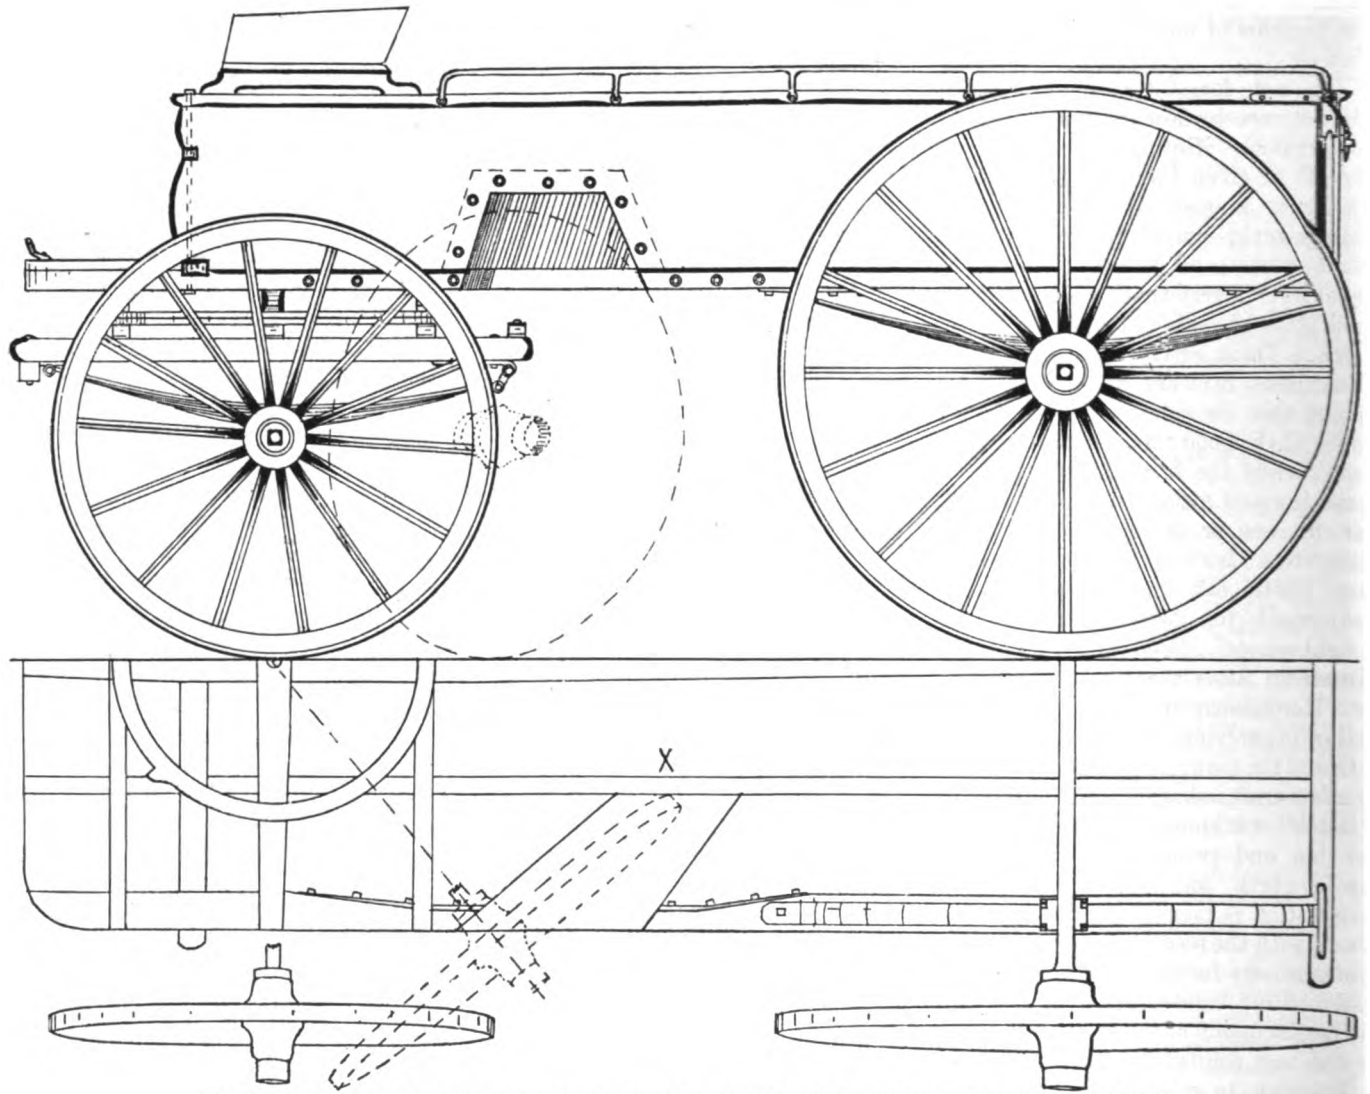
SIDE ELEVATION AND HALF PLAN OF SIMPLE FARMER'S WAGON. SCALE, 1 INCH EQUALS 18 INCHES.
